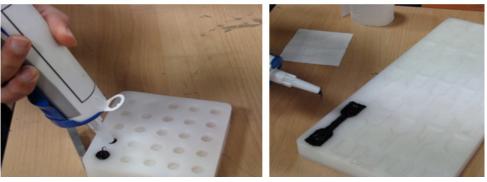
Silicone rubber molding of the disk and dumbbell-shaped samples.
